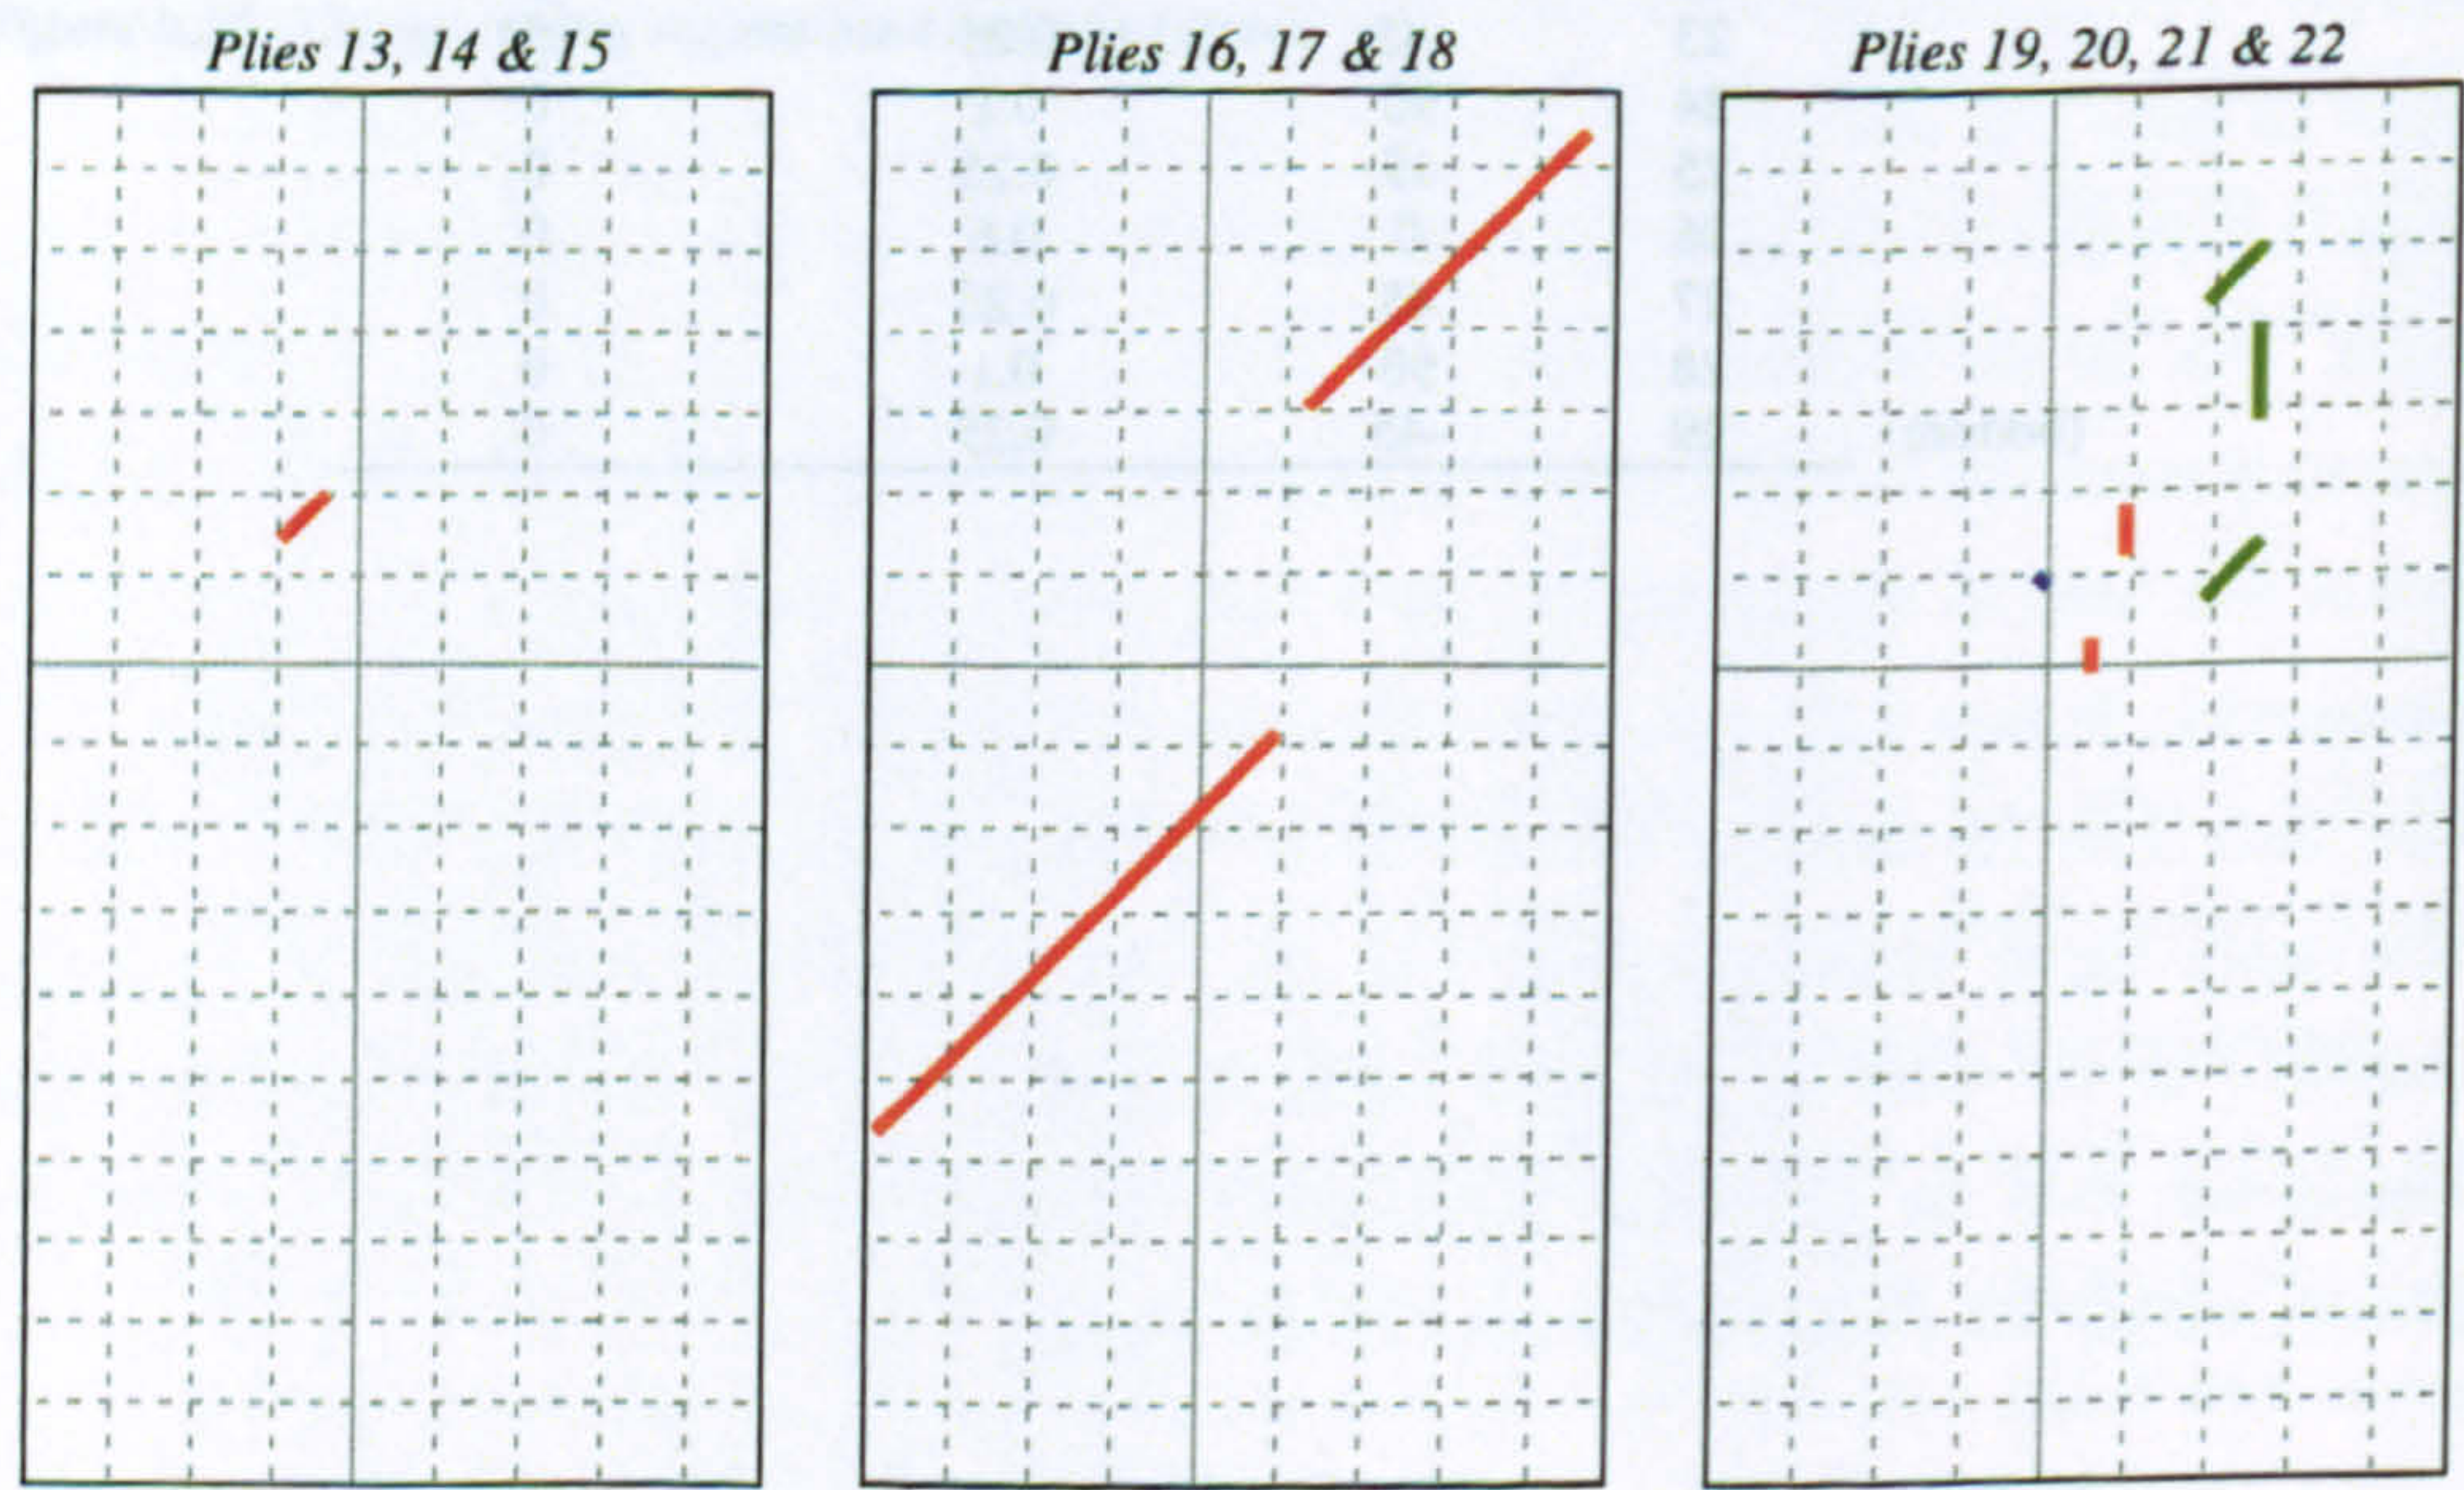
Plies 13 - 22 showing fibre cracks following a 200 J edge impact on an 8 mm thick plate (5 mm grid spacing)
